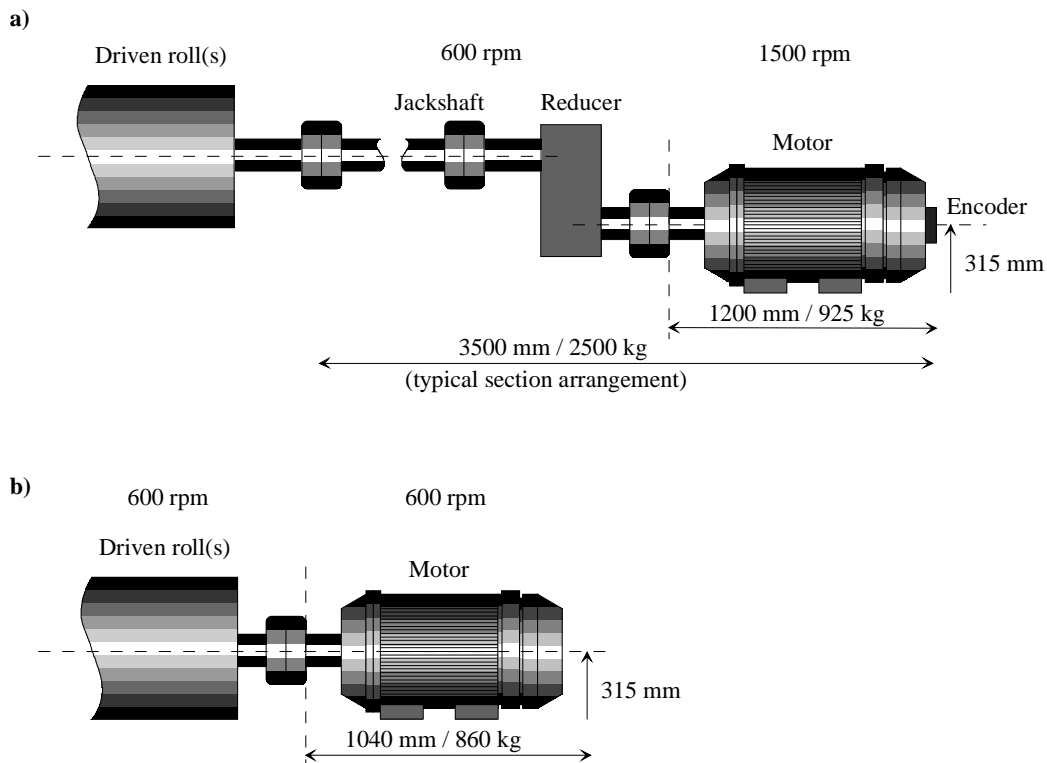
The interface of motor and driven roll. a) Conventional drive and b) gearless PMSM drive (Waltzer 2002).
